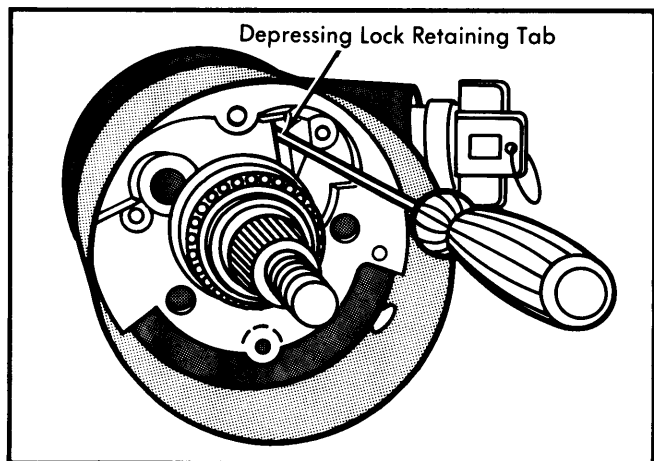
Depressing Lock Cylinder Retaining Tab on American Motors Vehicles
